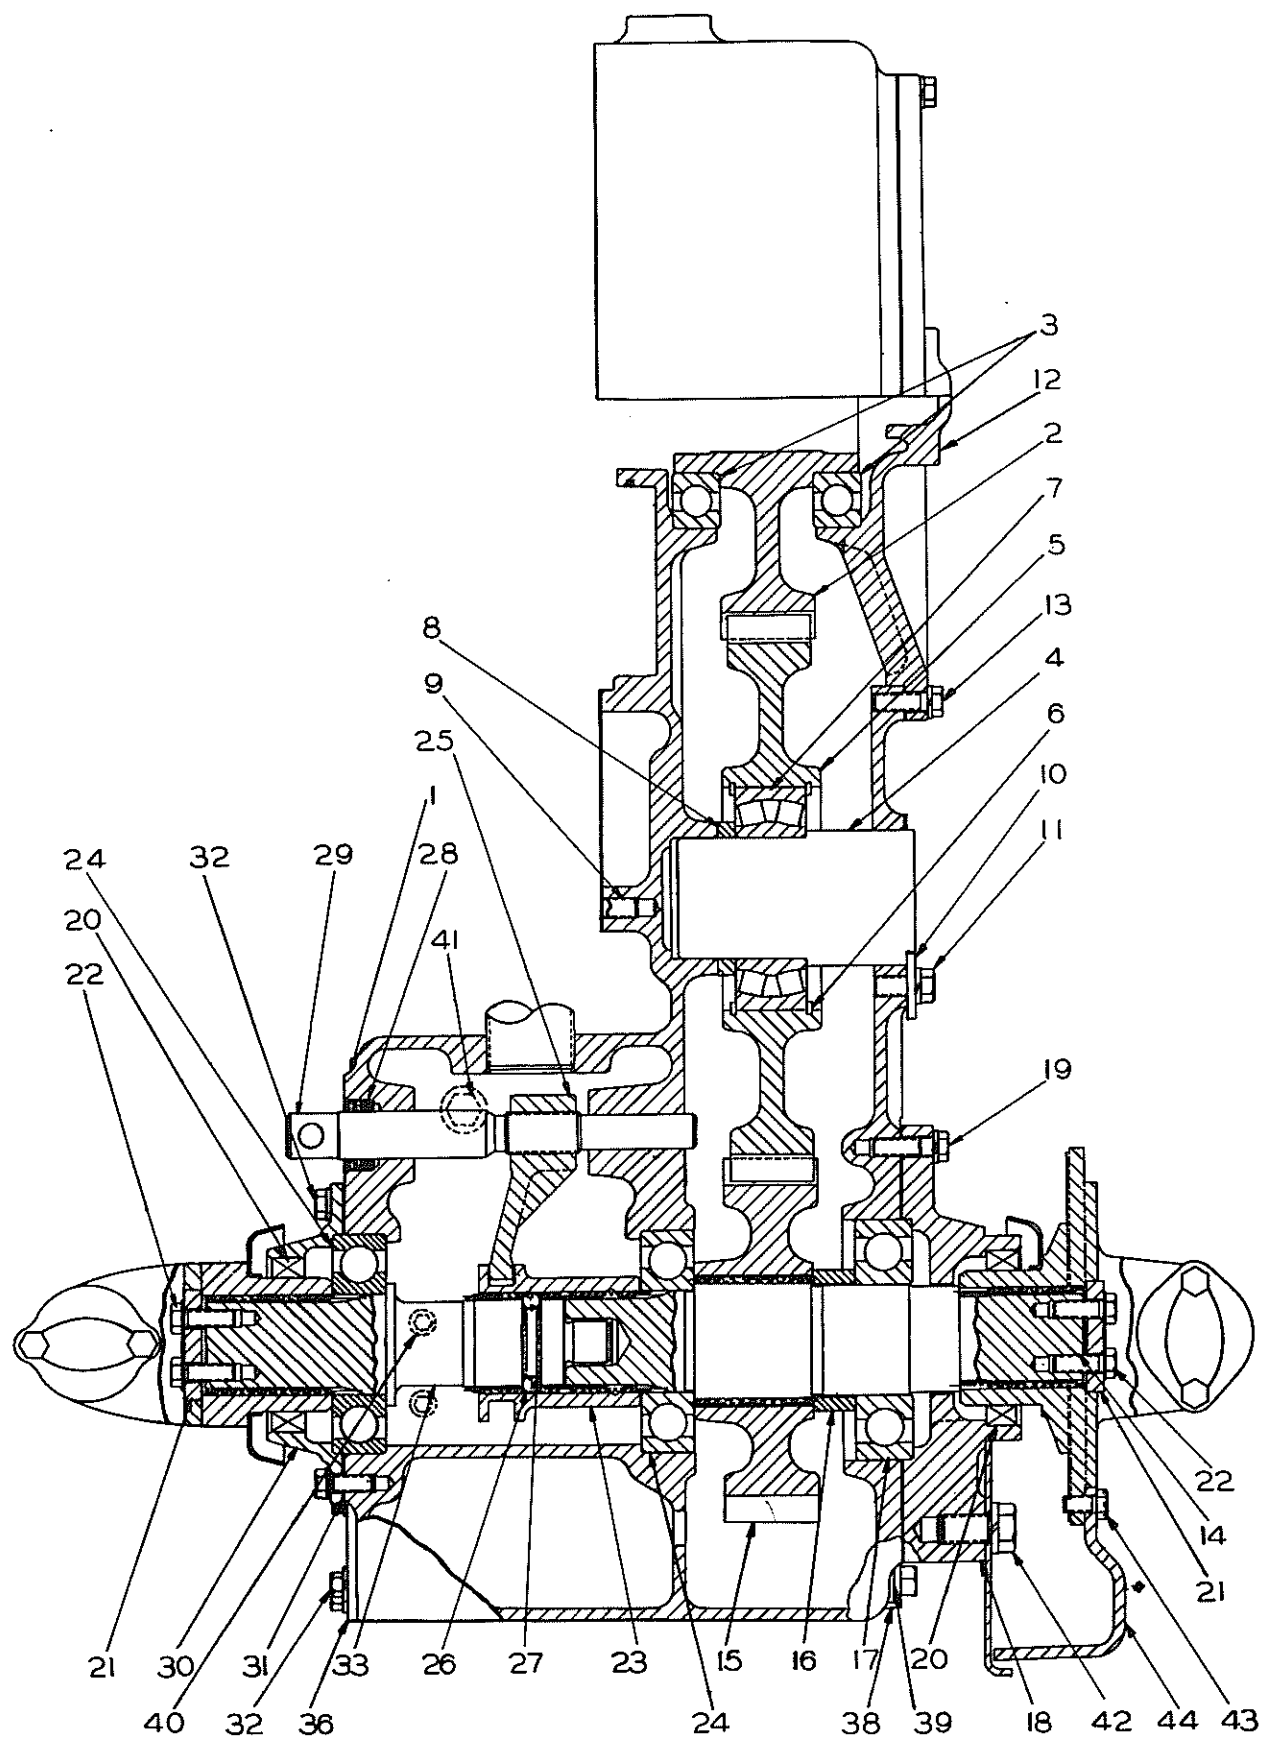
TRANSMISSION - TRANSFER GEARS AND HOUSING GROUP
